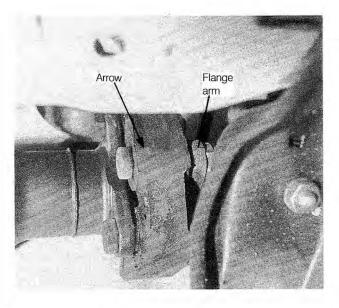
When attaching flexible coupling to driveshaft or to transmission flange, arrows must point toward flange arms as shown.
